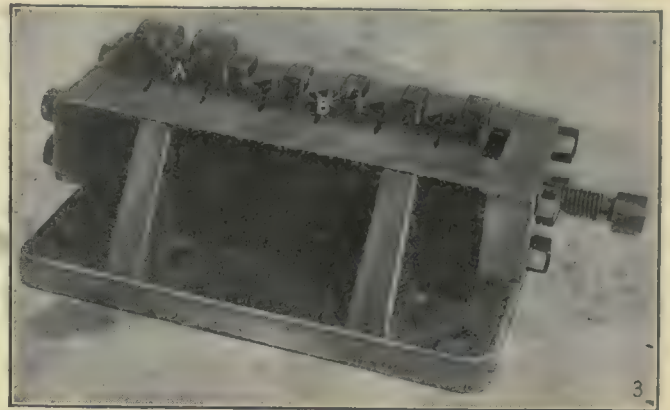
MULTIPLE MILLING FIXTURE FOR VALVE LIFTER
